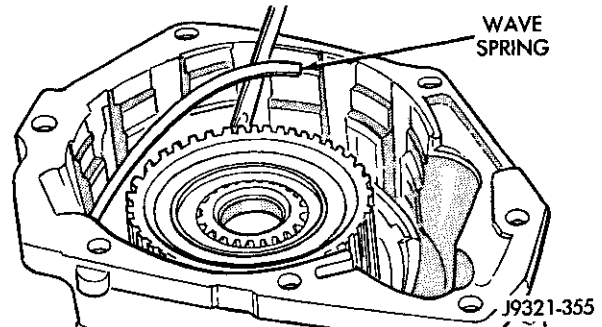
Overdrive Clutch Wave Spring Removal/Installation
